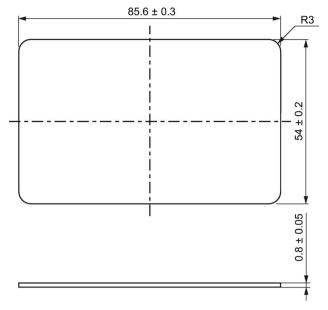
Dimensional drawing MDS D400 (dimensions in mm)
